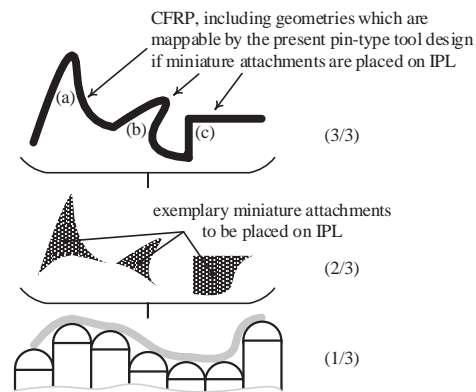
Extending manufacturing limits of already available pin-type moulds by assembling miniature attachments on the IPL.
